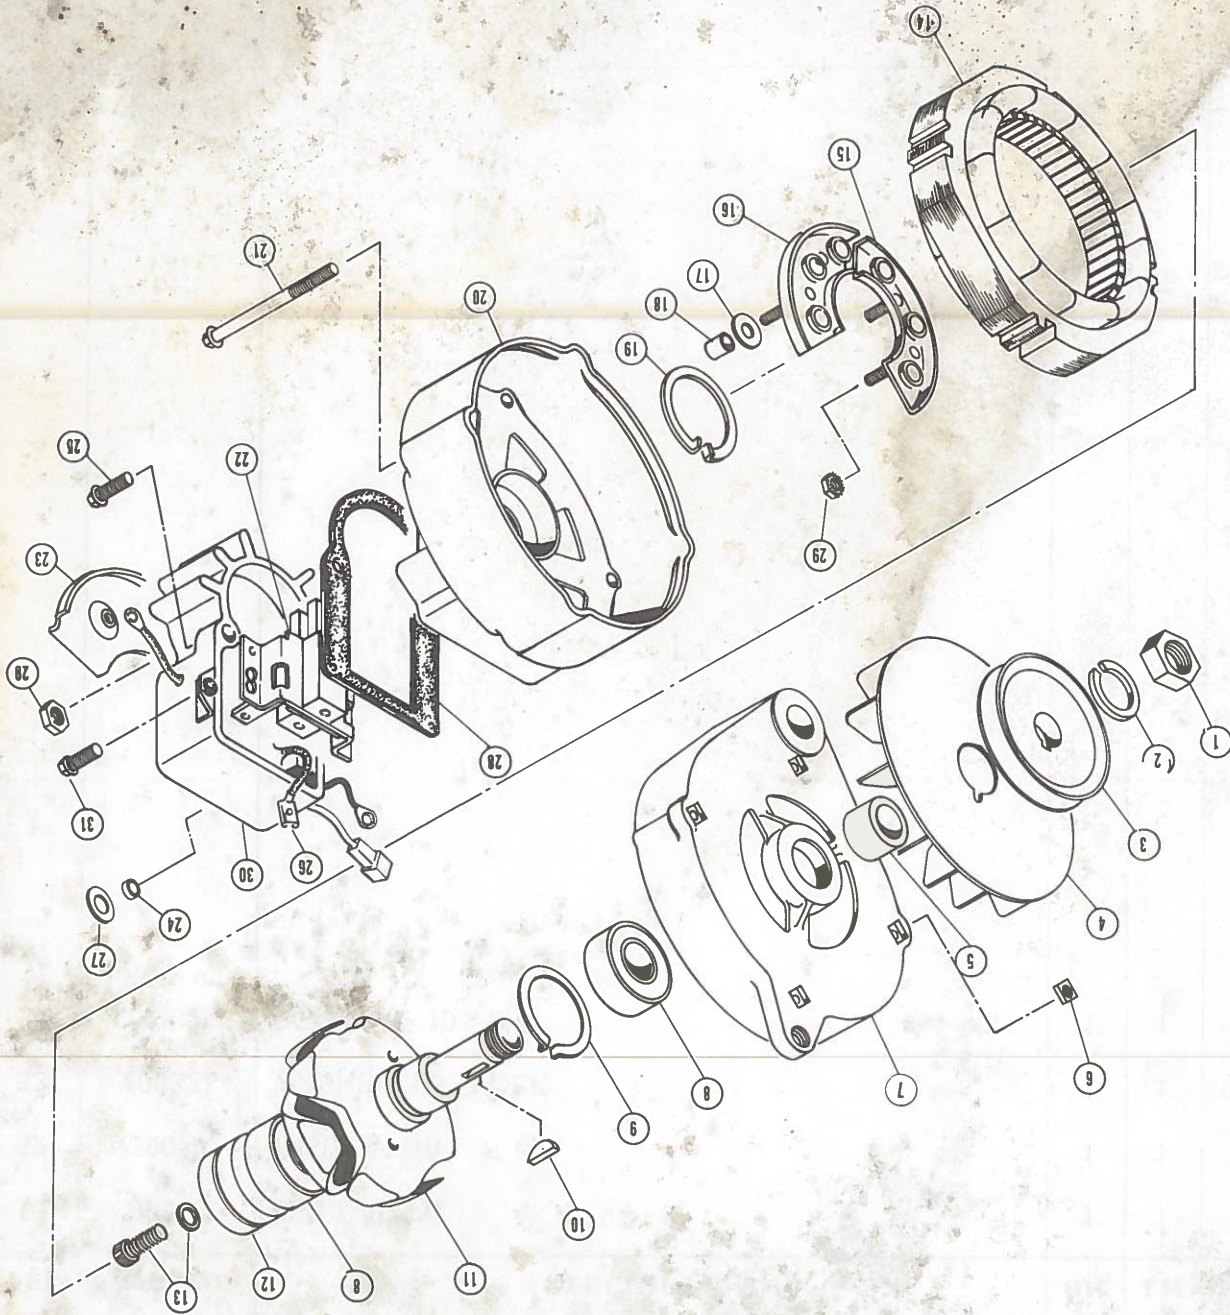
ALTERNATOR ASSEMBLY EXTERNAL REGULATOR
